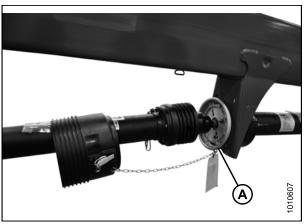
Driveline Shield Cone Removed from Metal Plate
